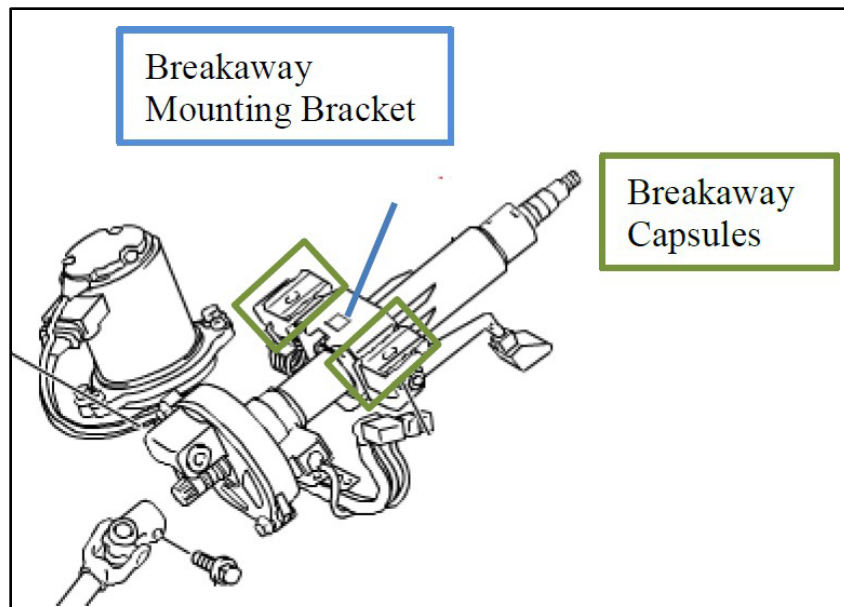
Breakaway Bracket and Breakaway [Shear] Capsules
